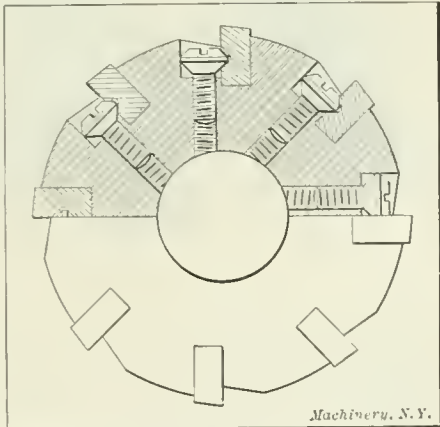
Sectional View of Adjustable Reamer showing Method of Binding Blades
